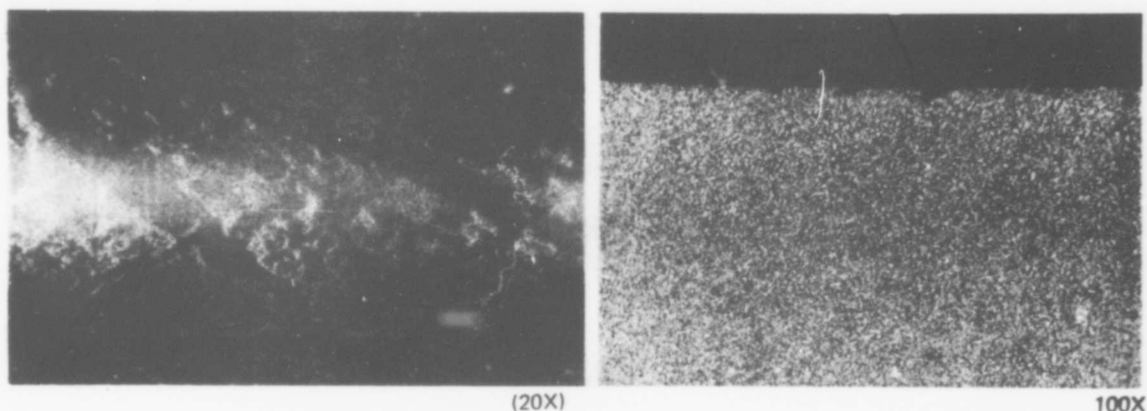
SEVERE I.D. SURFACE ROUGHNESS SHOWN IN PLAN VIEW AT LEFT AND CROSS-SECTION AT RIGHT, THIS CONDITION WAS COMPLETELY REMOVED BY CHEM-MILLING 0.002 IN. OF SURFACE
